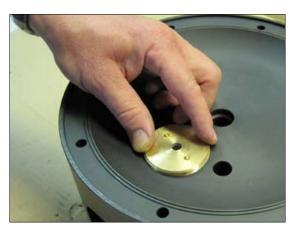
Carefully screw the endcap by hand into the centerblock (123). Sometimes you have to first screw counter clockwise until the threads match.
